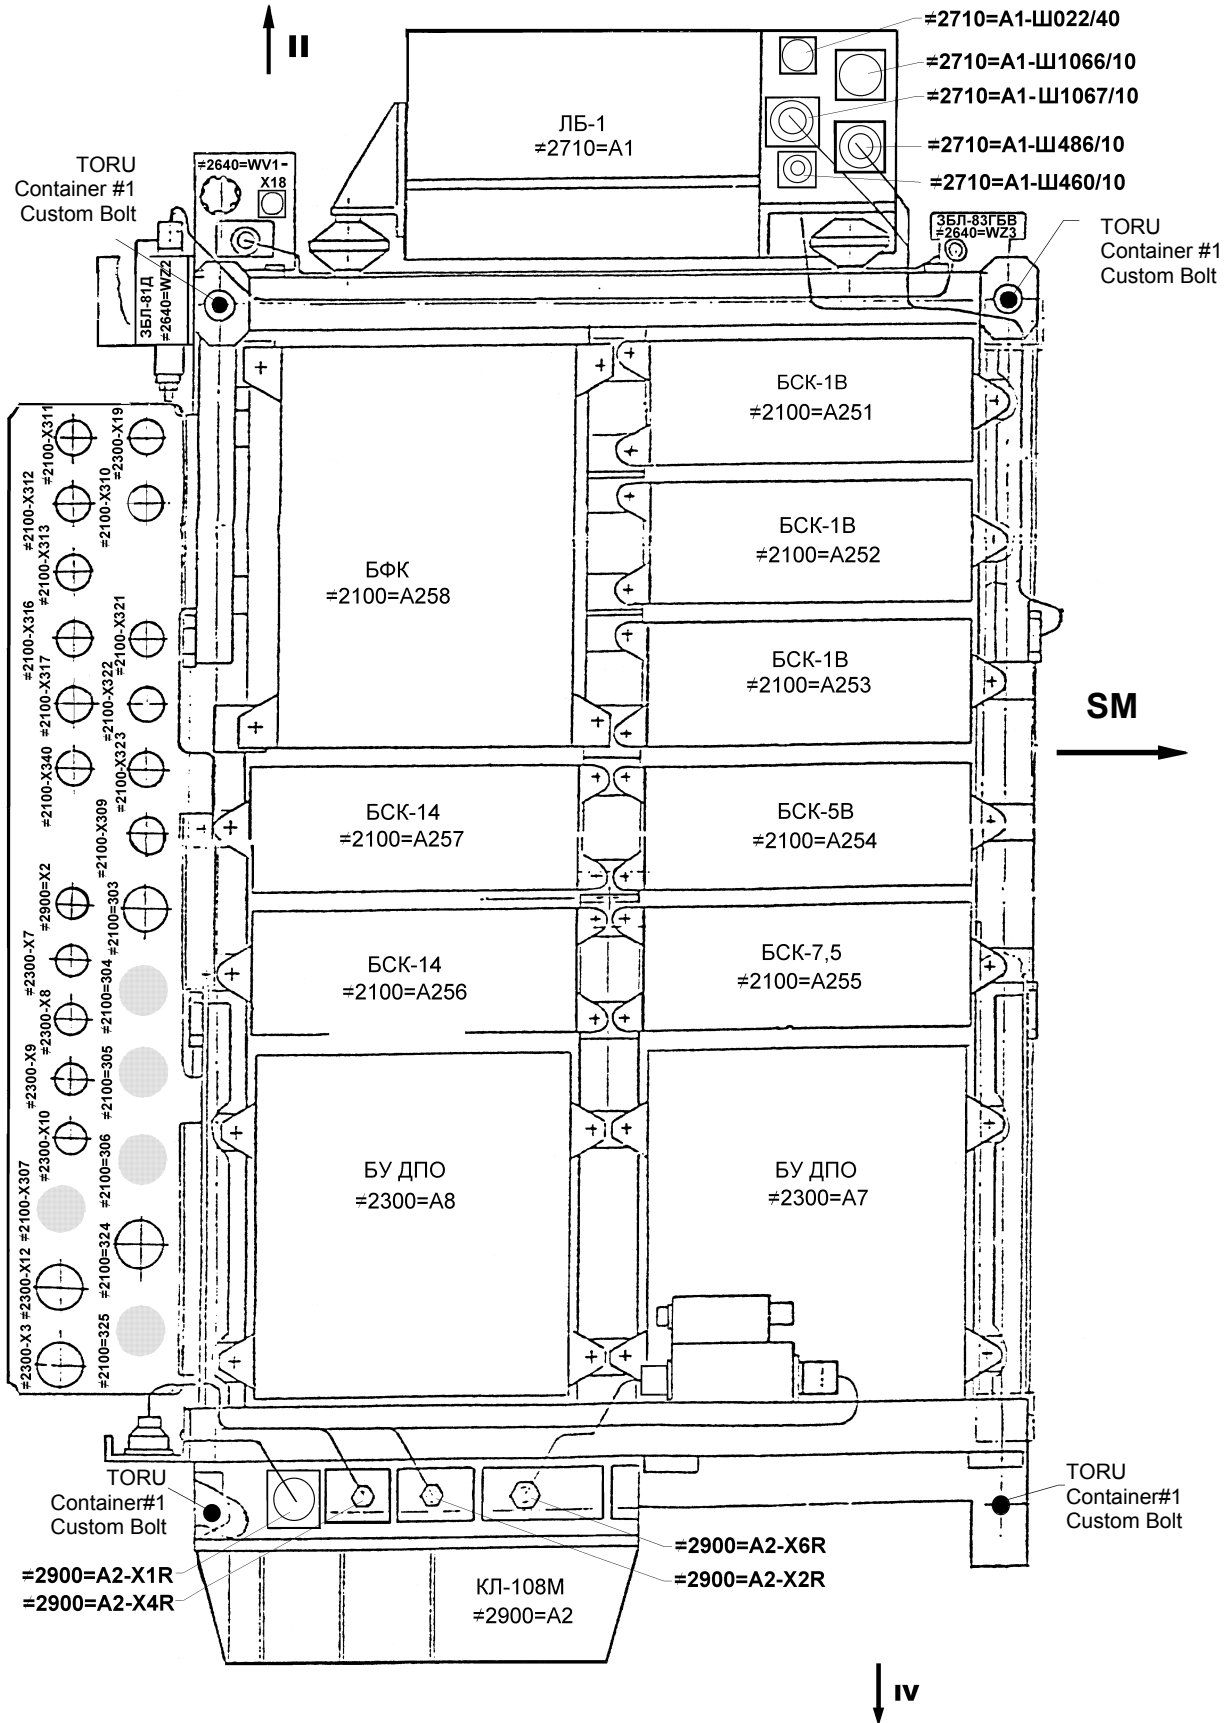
TORU Container #1 (77KM.2380-0)
